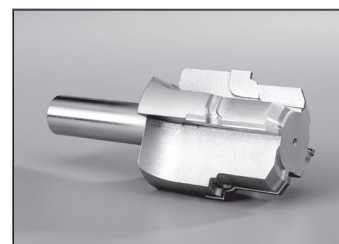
ISO 6149-1 Straight Thread Port Counterboring Tool with ID Groove
